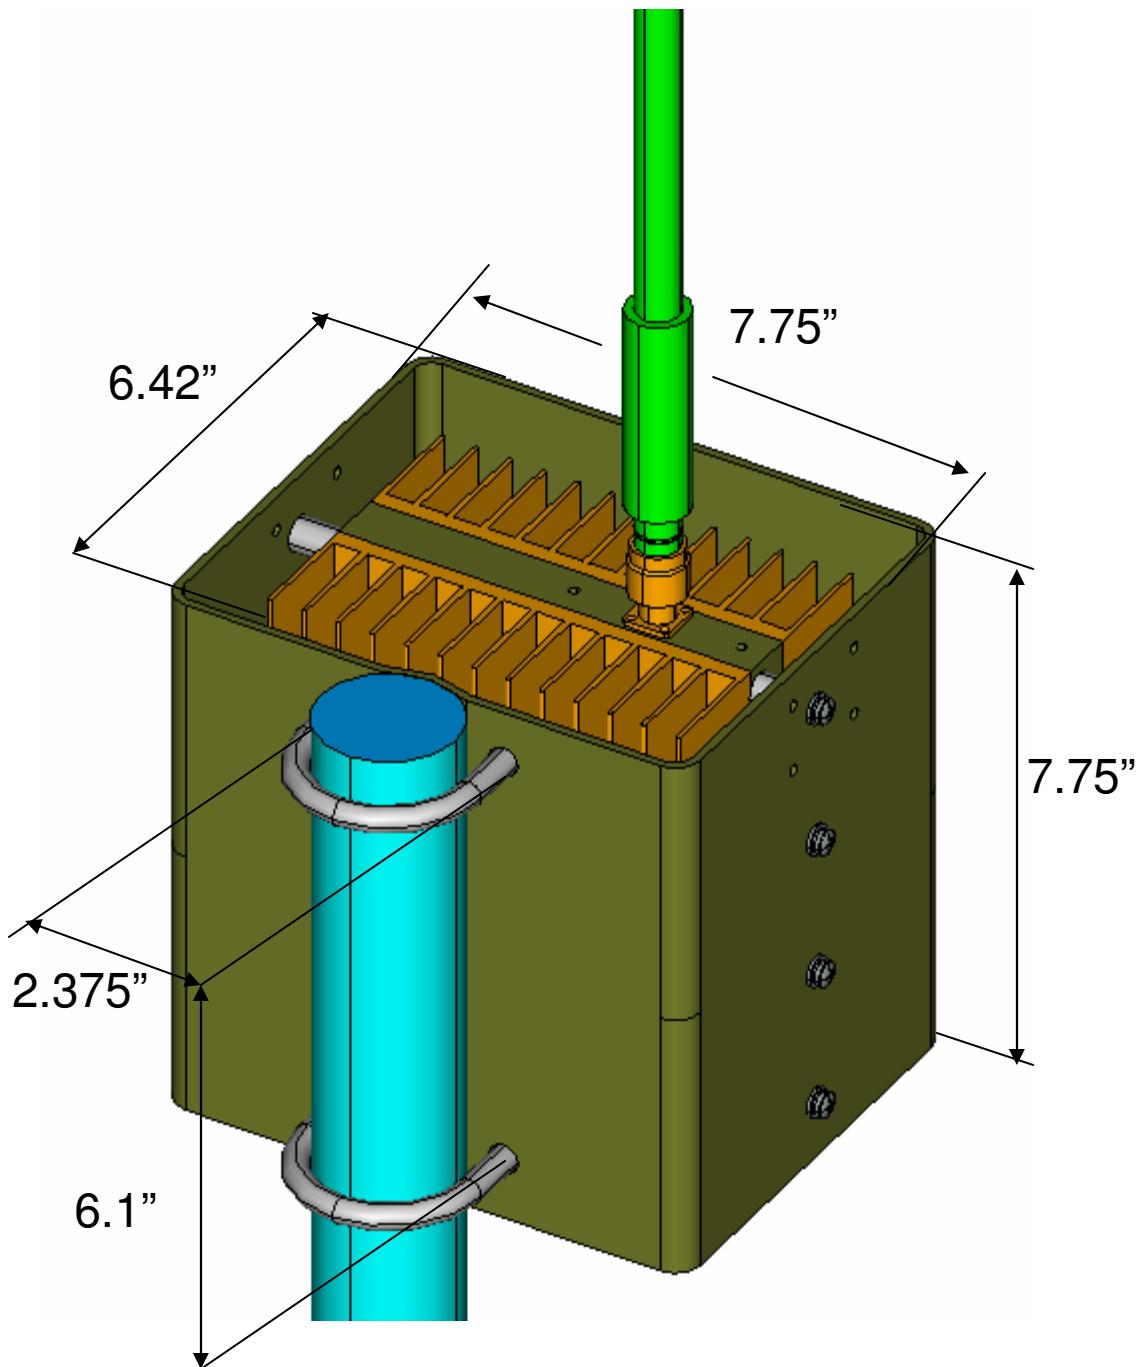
Typical RF Outdoor Unit Mount to Mast
